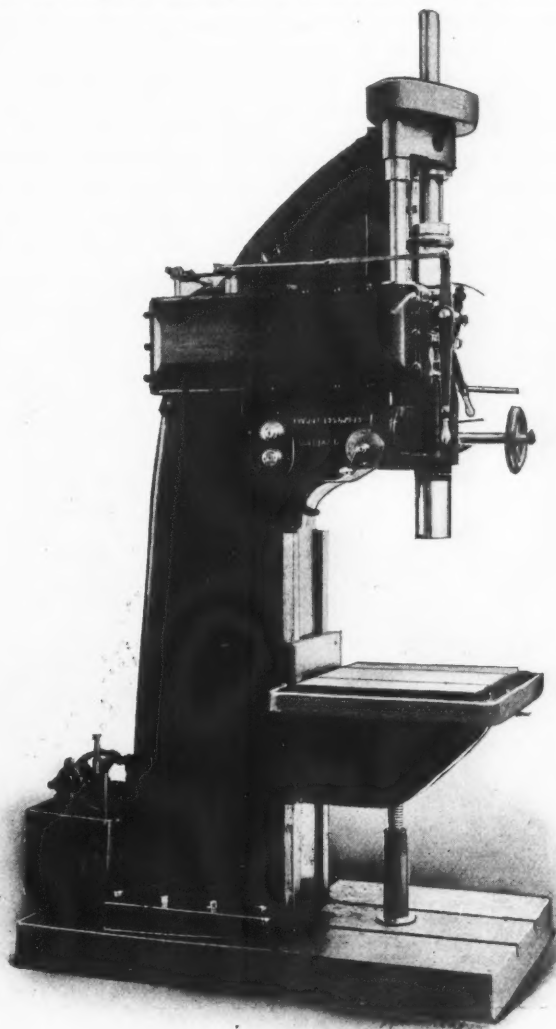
Baker Bros. Heavy-duty Drilling Machine
